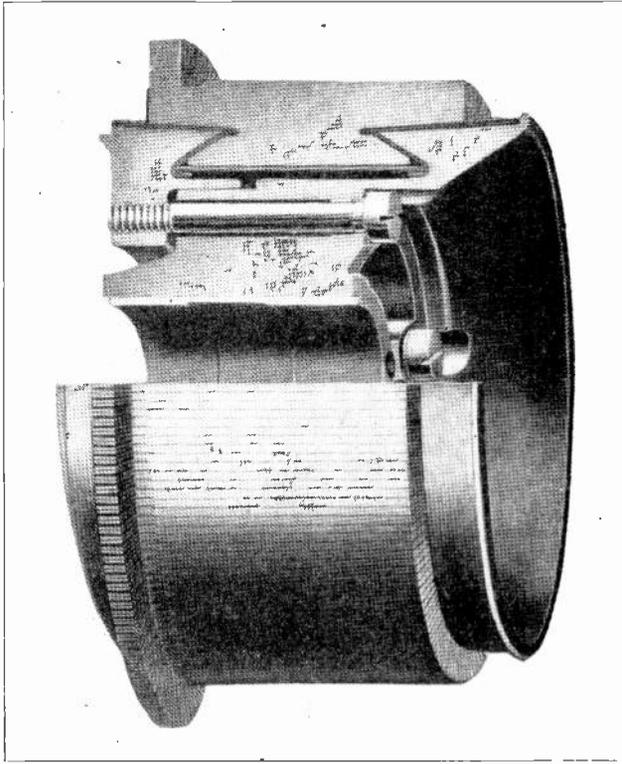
This view shows another type of commutator in which the bars are held in place by bolts that are used to draw the clamping rings tight.
